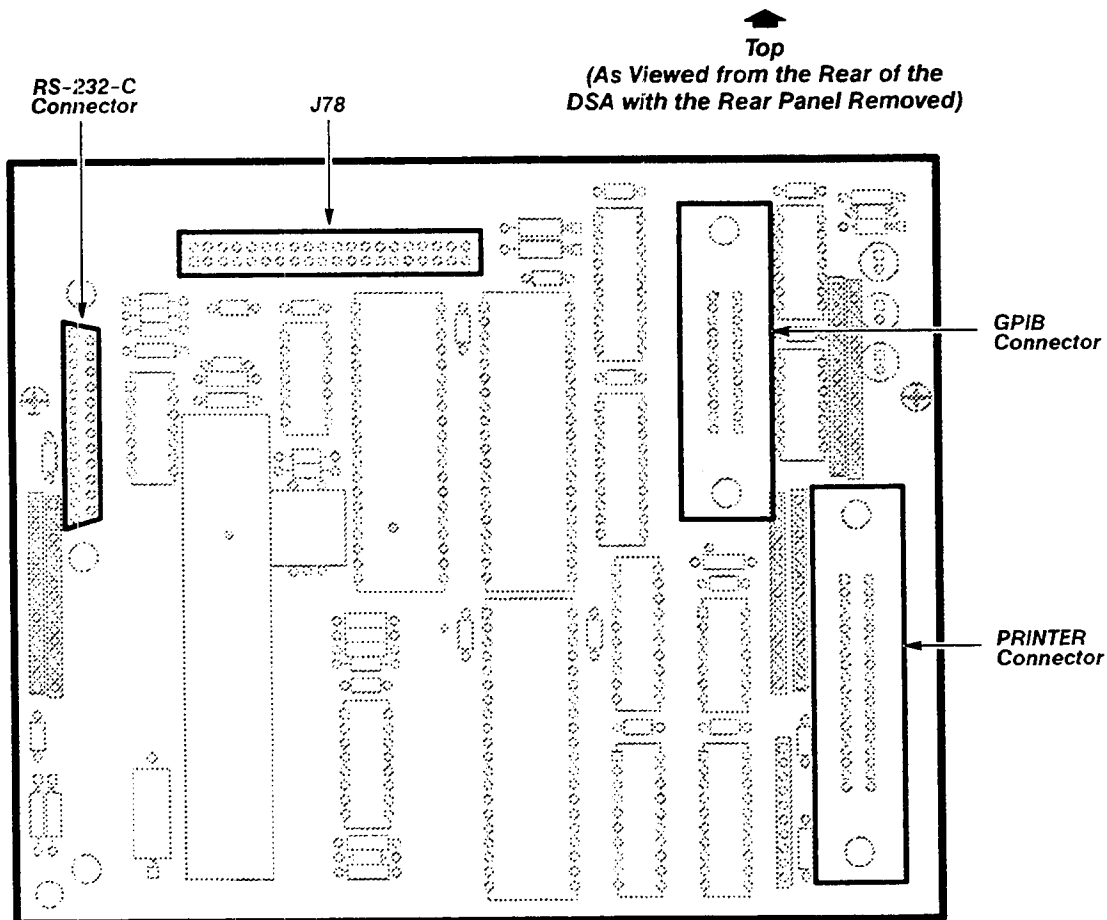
Removing/Replacing the A12 Rear Panel Assembly
